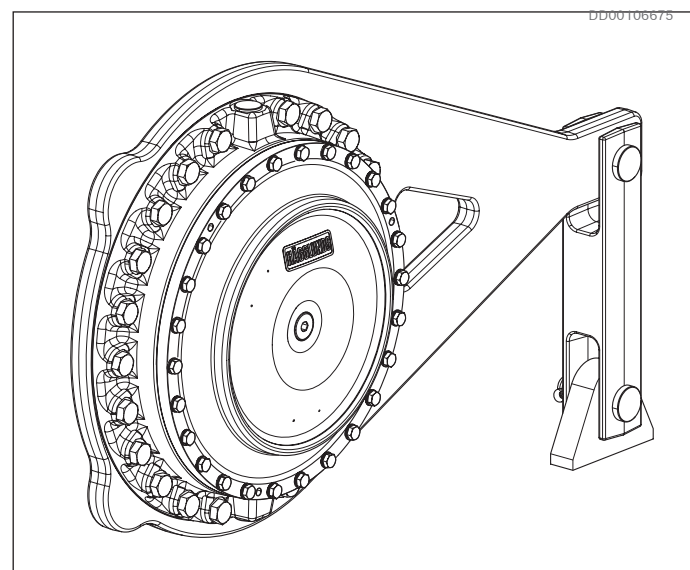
Example MDA 14 or MDA 21 seperately mounted (torque arm mounting).
